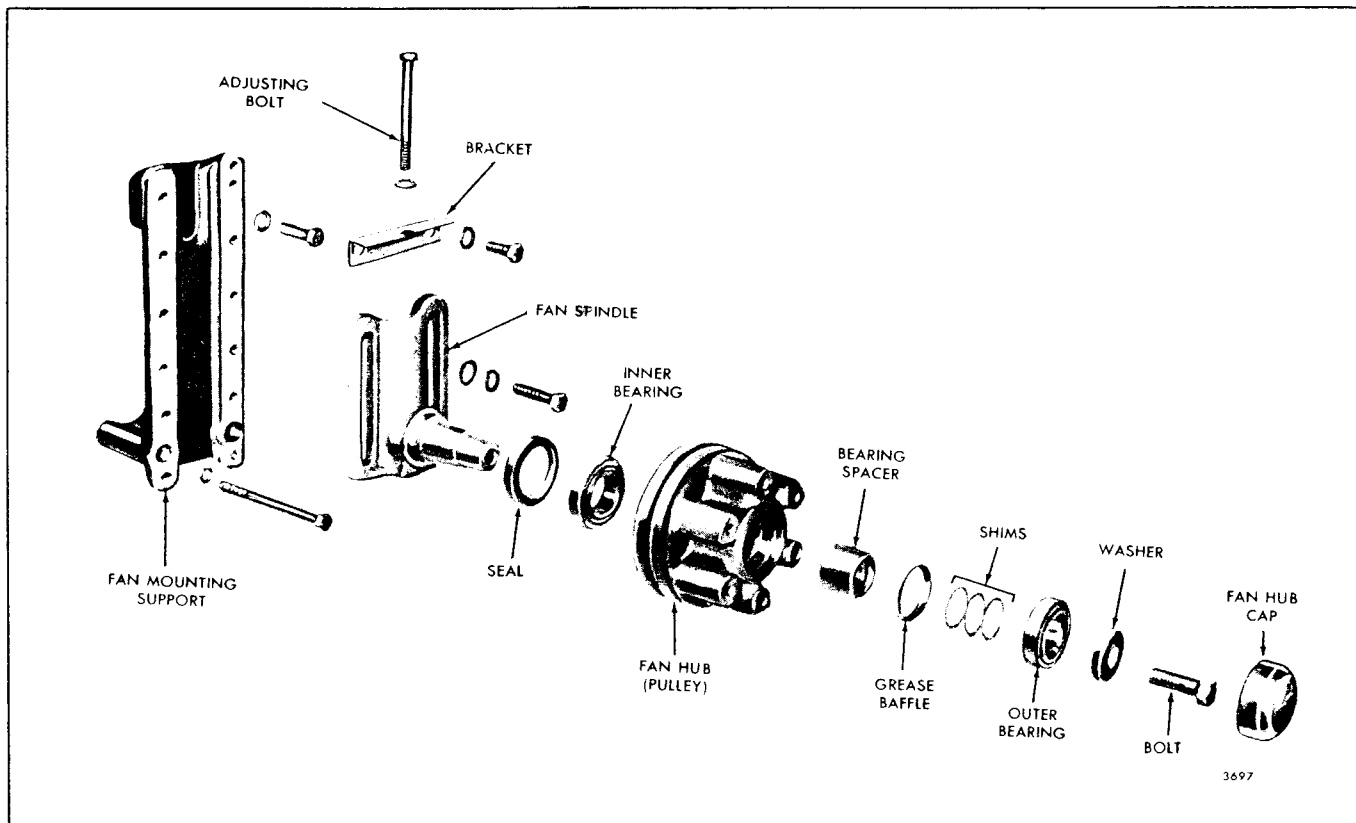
Typical Fan Hub and Spindle Details and Relative Location of Parts (6V and 8V Engine)
